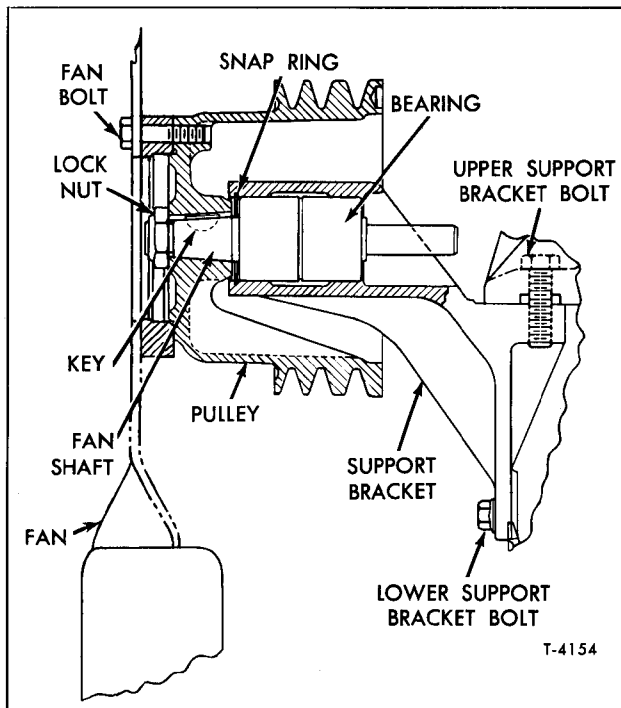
Separately Mounted Fan Support Assembly (8V-71 Engine) (Typical)
